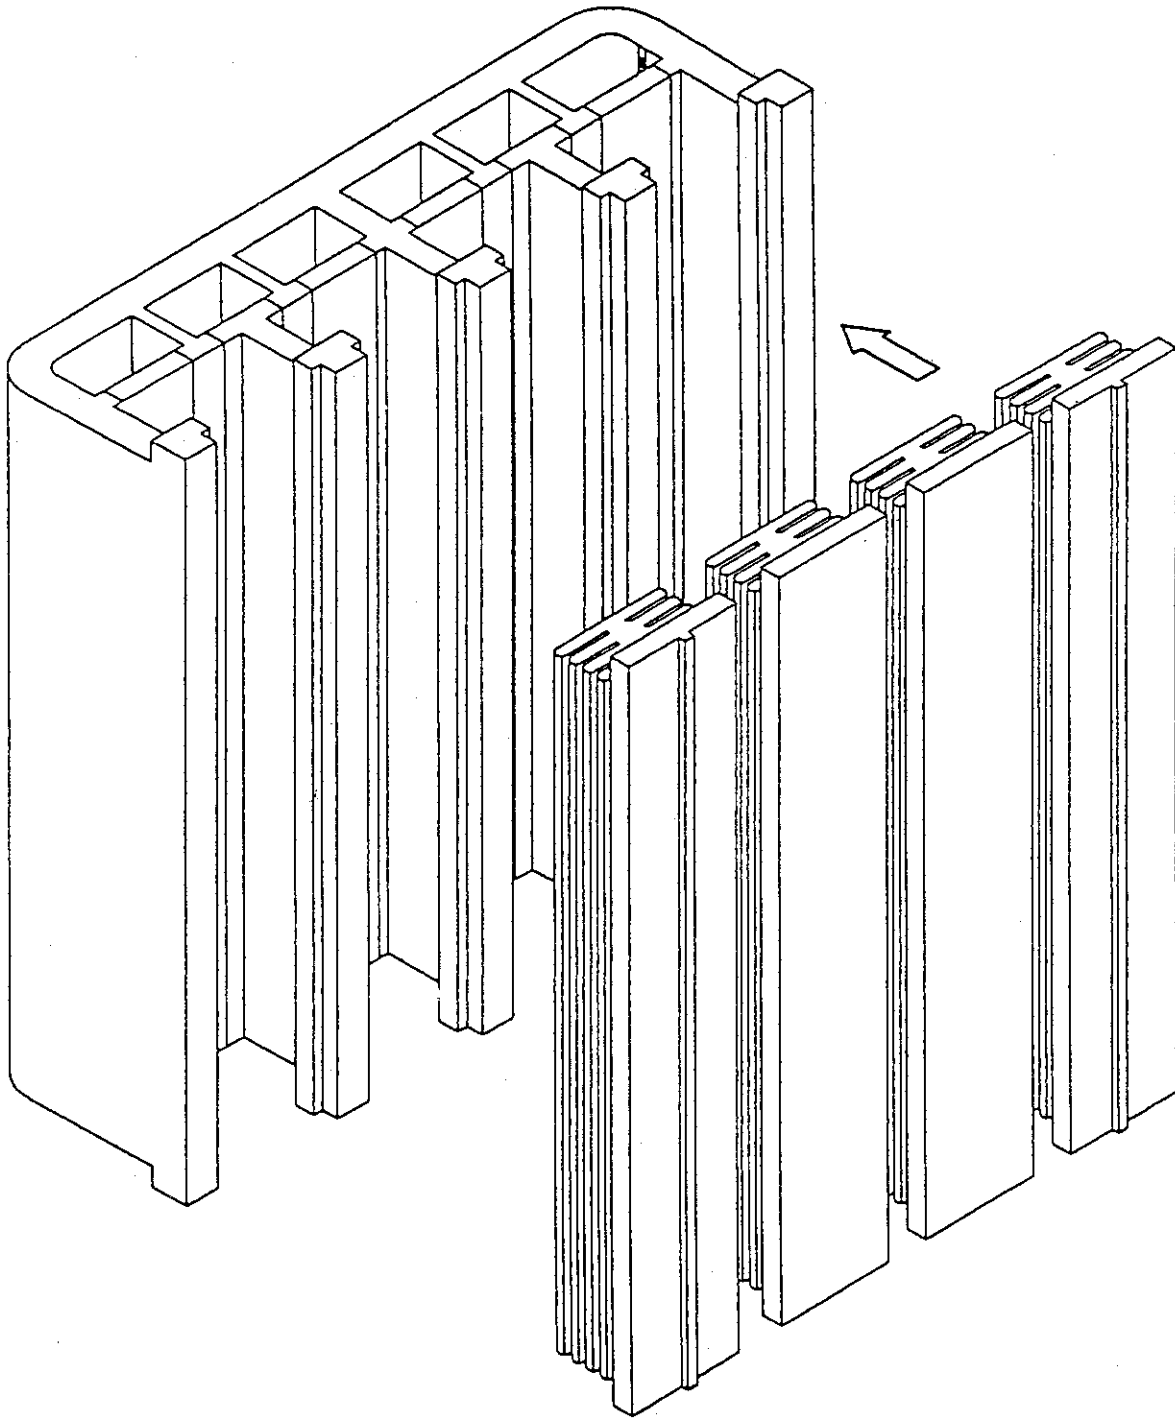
4 Jointing the second wall to the rib and the front part of the side wall by TIG or EB welding.
